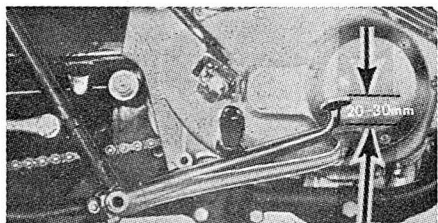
Rear brake pedal should normally lock rear wheel when compressed approximately  $\frac{1}{8}$  inch.
